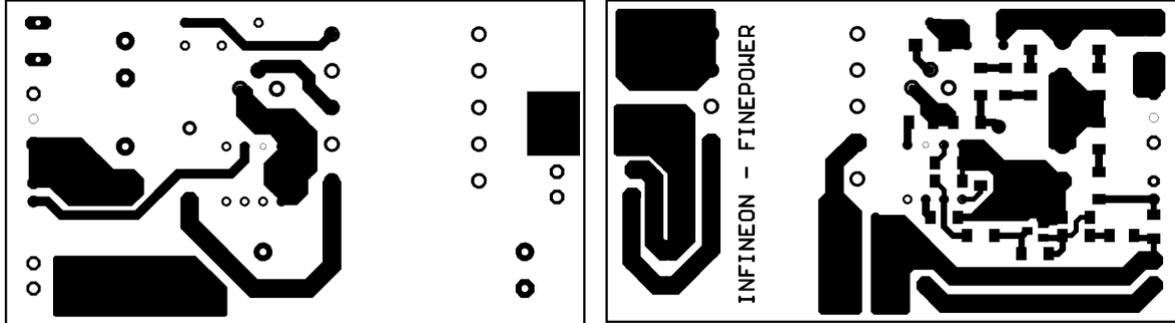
Layout TOP - left and BOTTOM (mirrored) – right
